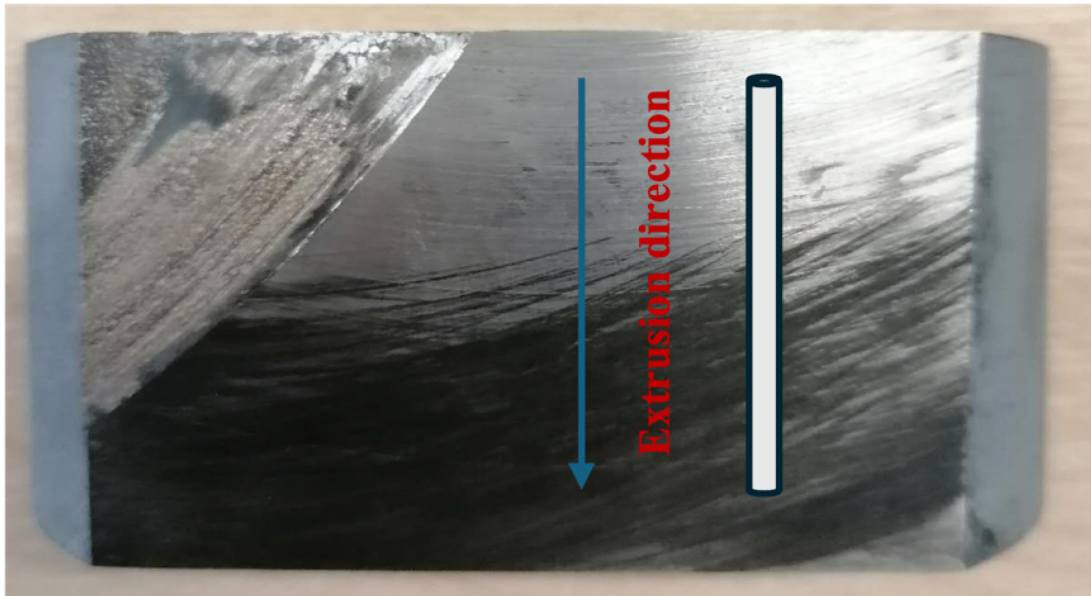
WE43 extruded bar and schematic drawing for EDM cut.
